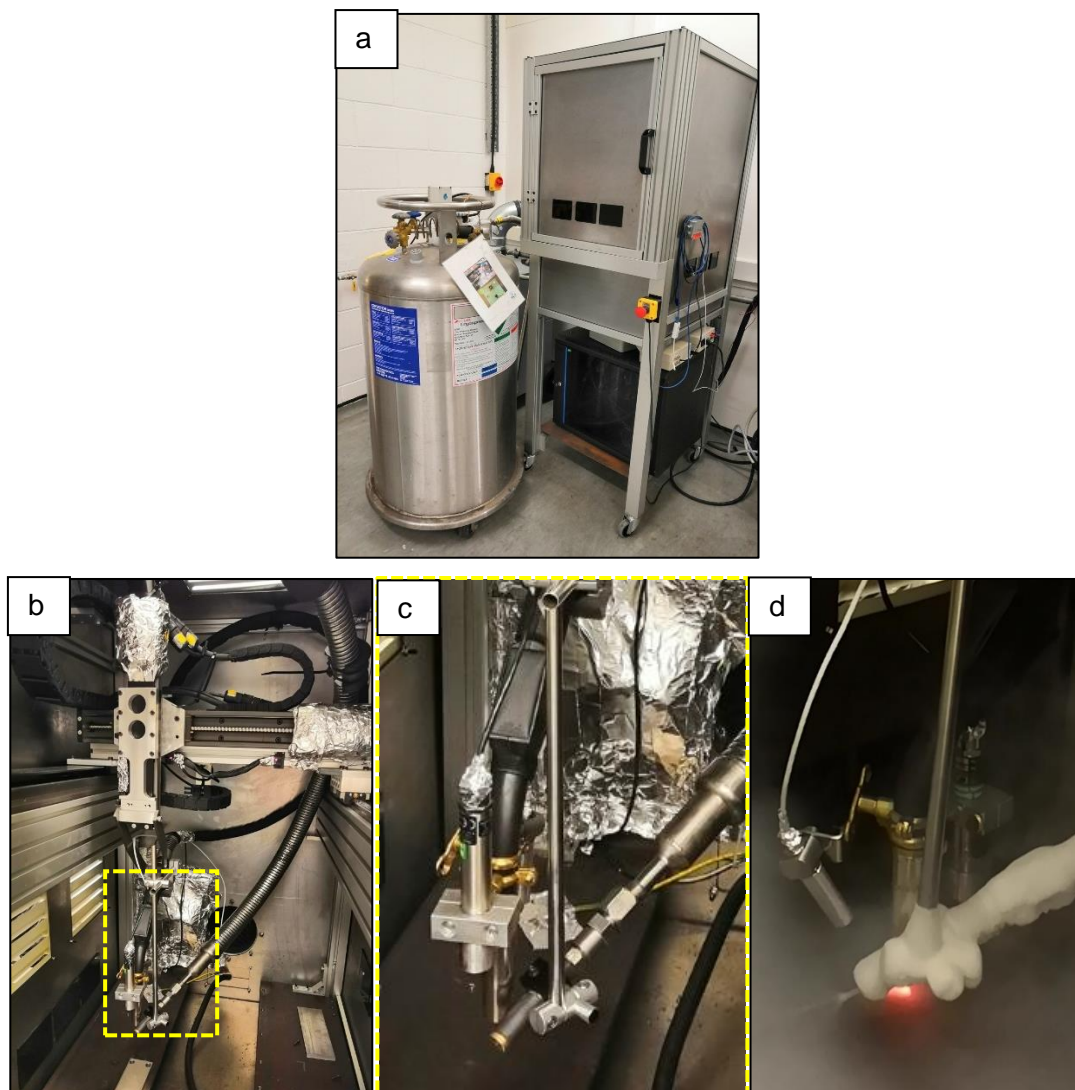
a) Overall WAAM platform set up for CRYO experiments b) CRYO nozzle mounted to z-axis c) Magnified view of the location of CRYO nozzle mounted to z-axis d) In-process CRYO showing the LN₂ jet striking the WAAM deposit surface.
